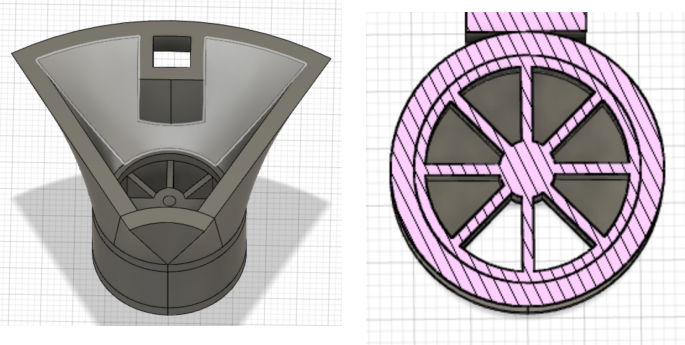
Fig. E Left: Rotary Cup Filler. Right: Cross section view from the top
